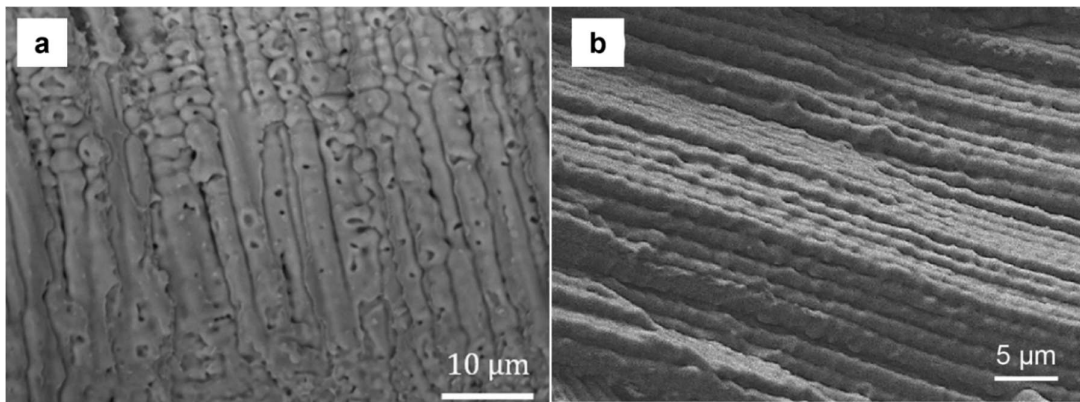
Fractographs obtained from the AM samples that underwent solidification cracking during fabrication. (a) Dendritic fracture surface of the intergranular cracked samples of Ni-based superalloy with single-crystal (SX) compositions printed using EPBF [166]. (b) Cellular fracture surface of the cracked samples of CoCrFeNi HEA manufactured using LPBF process [256].
